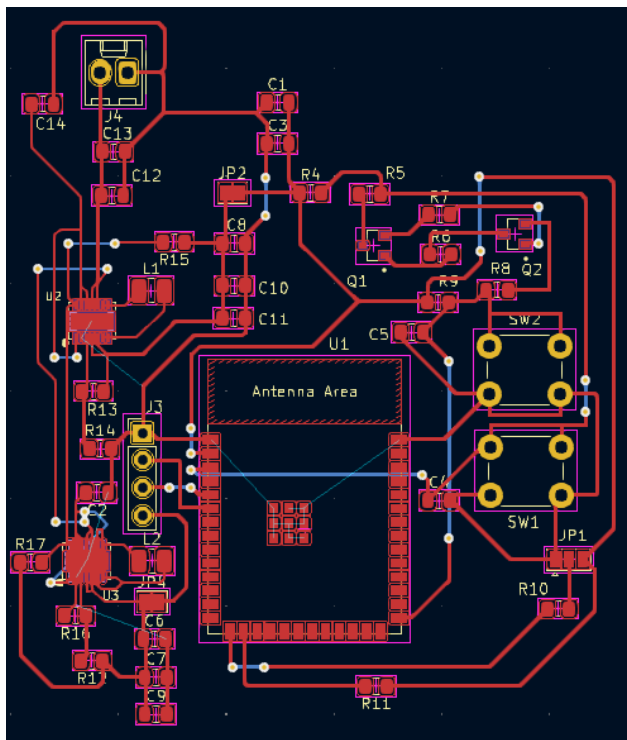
Initial Sensor Unit PCB Design Figure 2.1.1.3: Final Sensor Unit PCB Design
